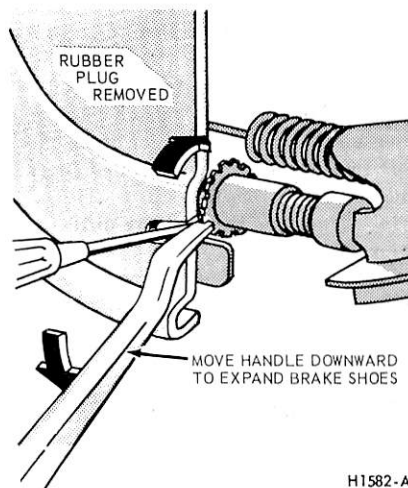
Backing Off Brake Adjustment—F-250-350, E-300 and P-350-400-3500-4000
